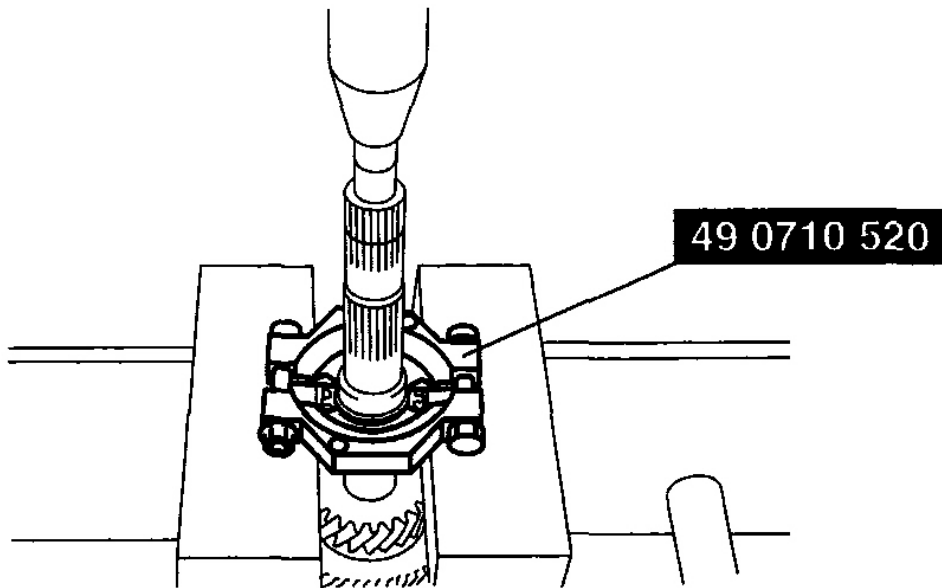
Removing Maindrive Gear Shaft Bearing Using SST & Press
